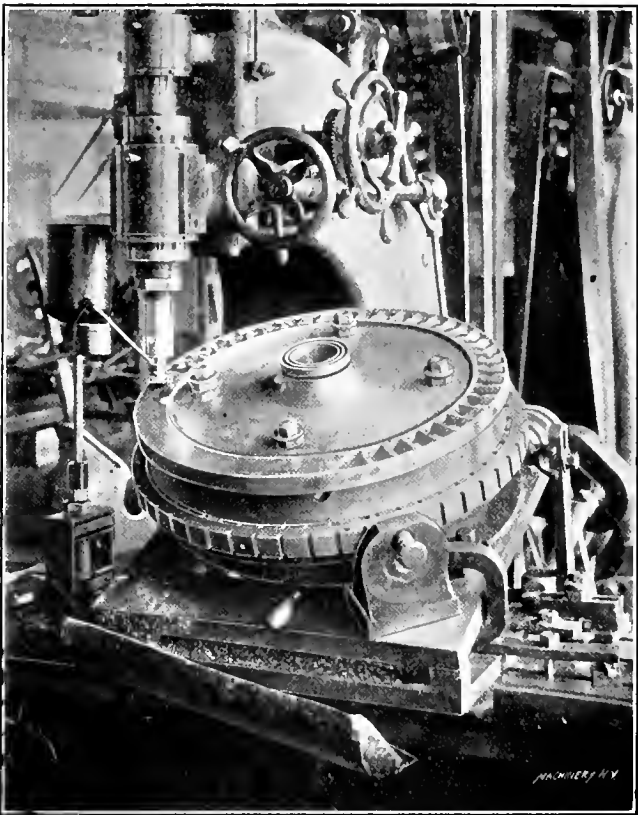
Cutting the Buckets in the Runner on a Vertical Miller.
